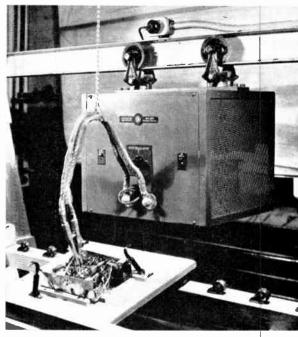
Capacitor welder on radio receiver production line, for welding of connections
